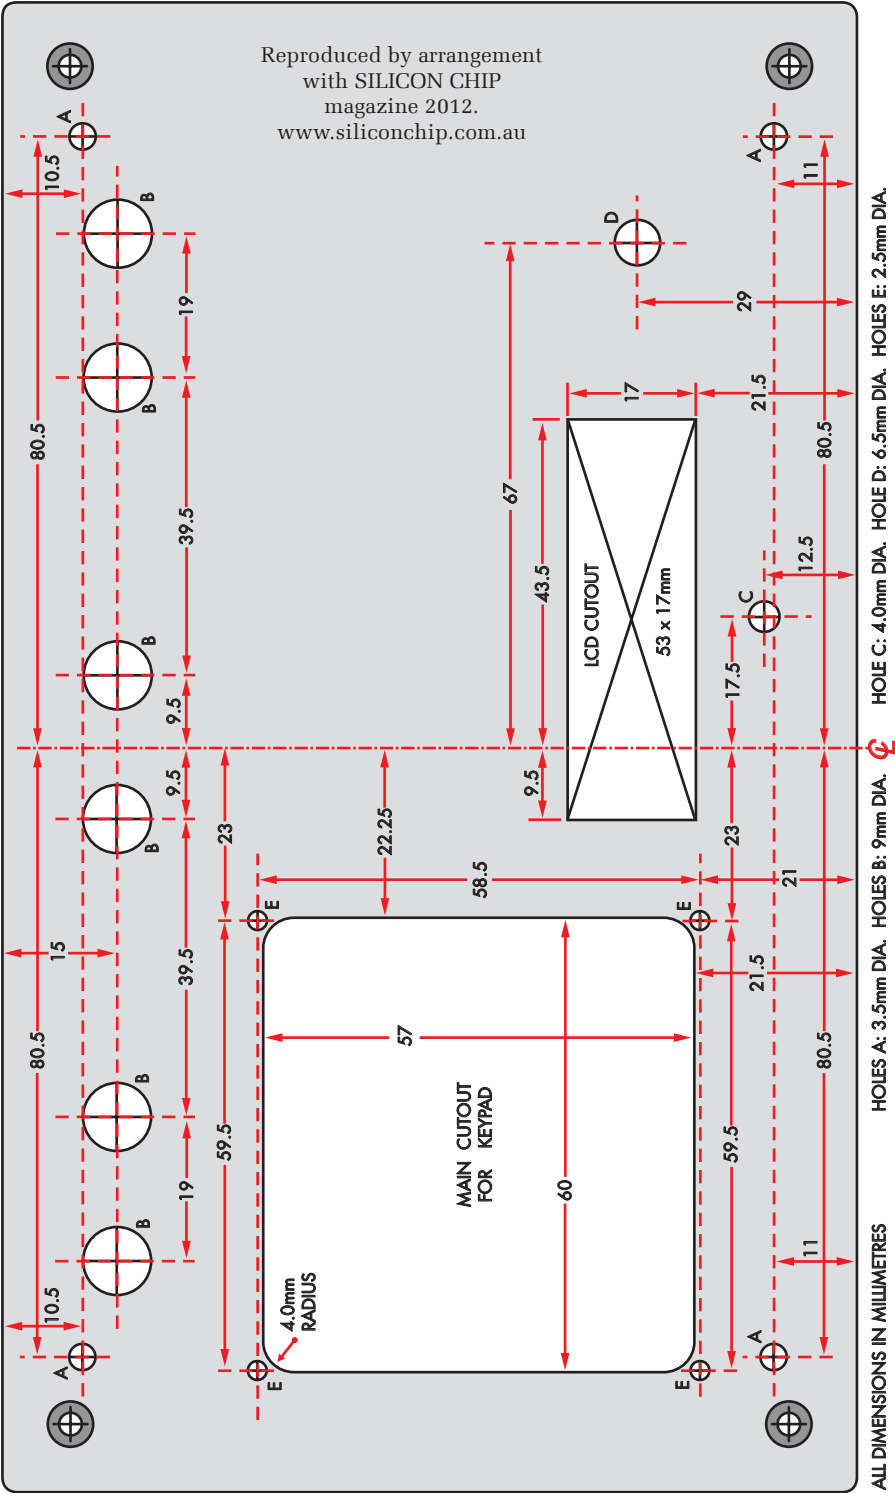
the drilling template for the lid. The rectangular cutouts are made by first drilling a series of small holes, then knocking out the centre pieces and filing the cutouts to a smooth finish.
